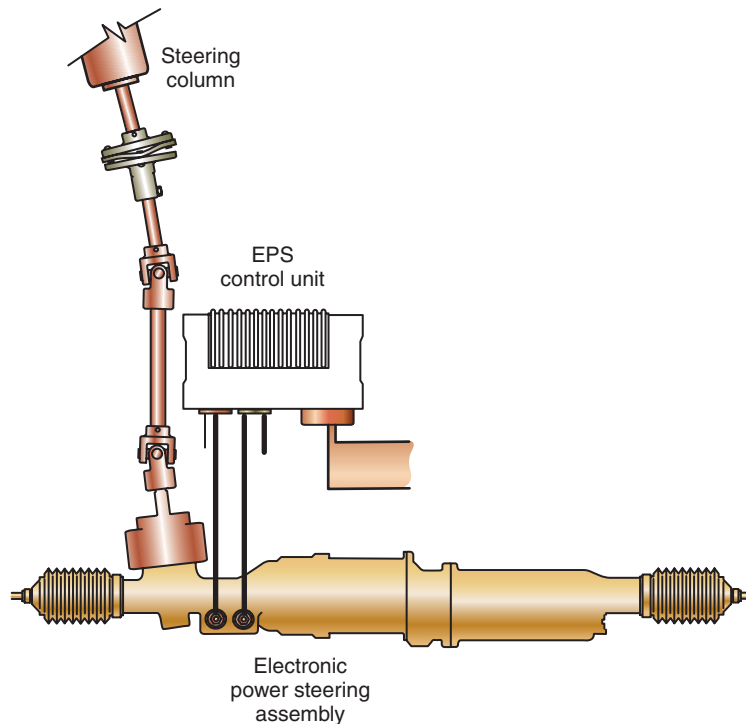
Steering gear with electronic assist and related system components.
